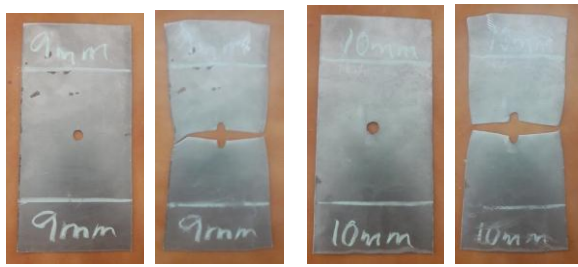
Specimen with 9mm and 10mm holes before and after testing
